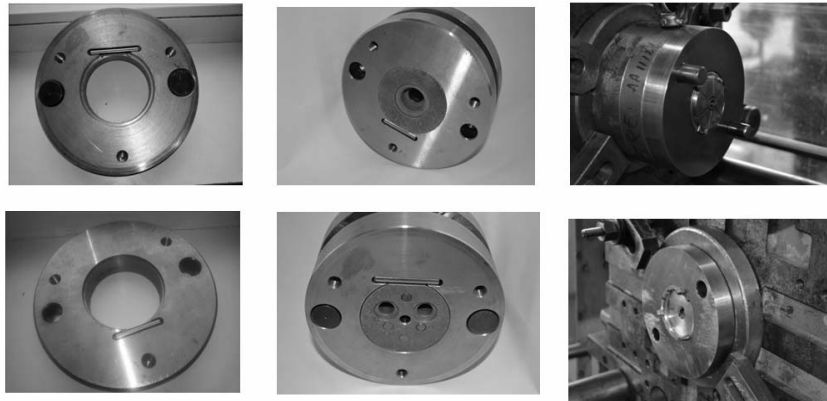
Tooling plates and tooling inserts made by SLM at TUCN mounted onto the plates.
